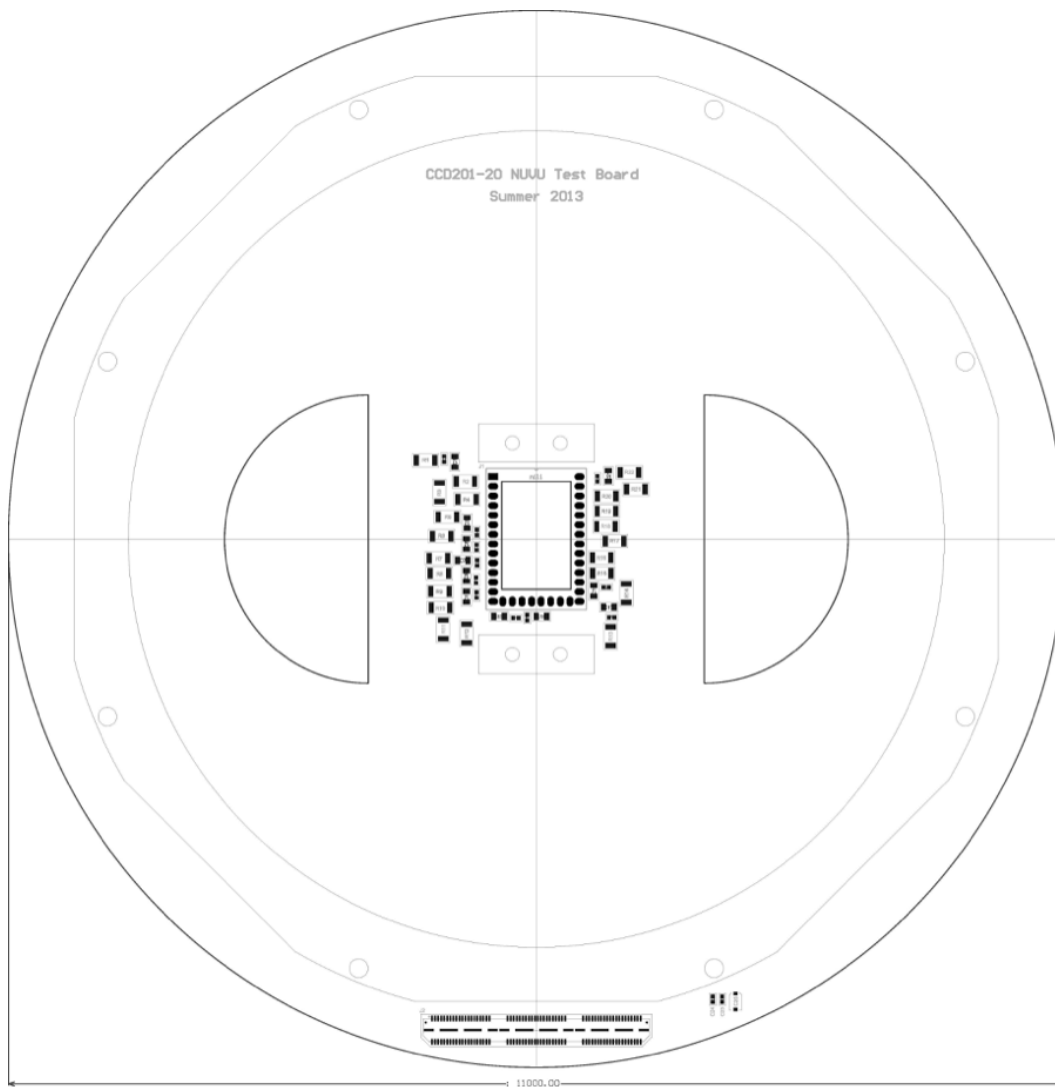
Lab PCB schematic. The vacuum shroud placement is visible in light grey, and the screw pattern and the footprints for the electrical components are stacked in close proximity to the EMCCD sockets. The SAMTEC connector footprint sits at the bottom of the board just outside the vacuum shroud, and the footprint for the HV clock capacitors is visible to the right of the SAMTEC footprint.
